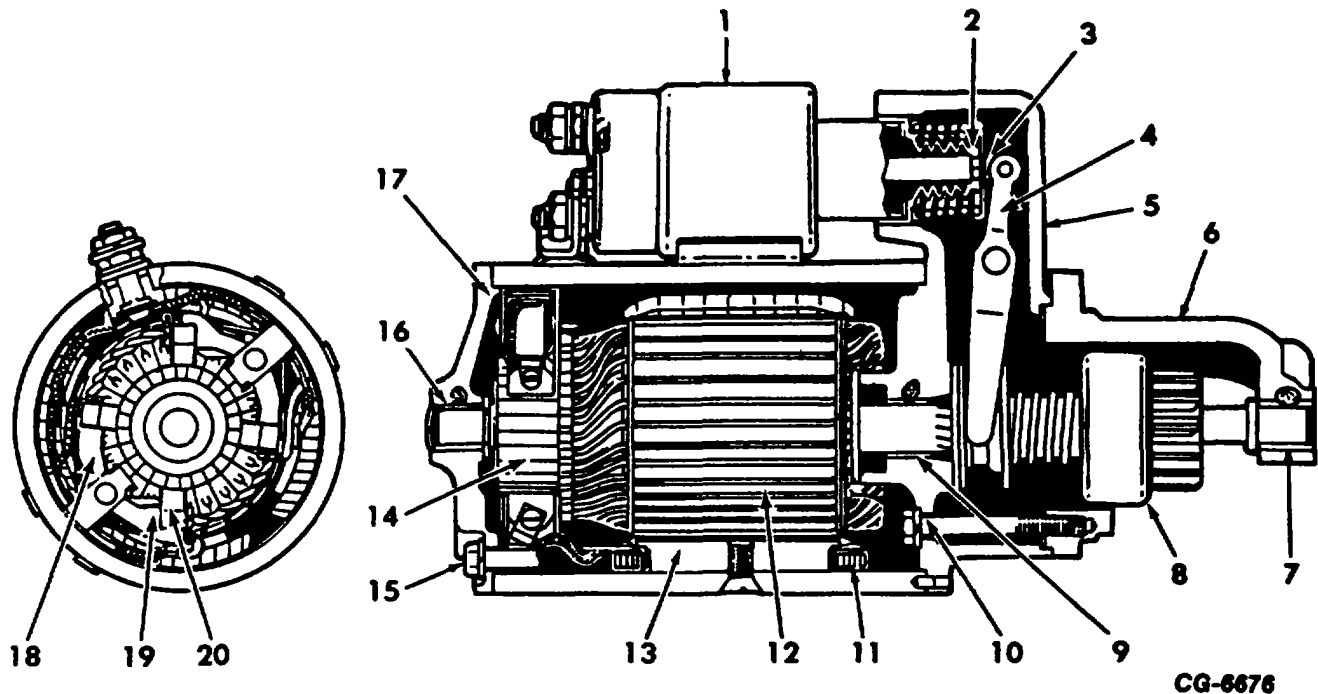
Sectional View of Starting Motor with International Duty Clutch
